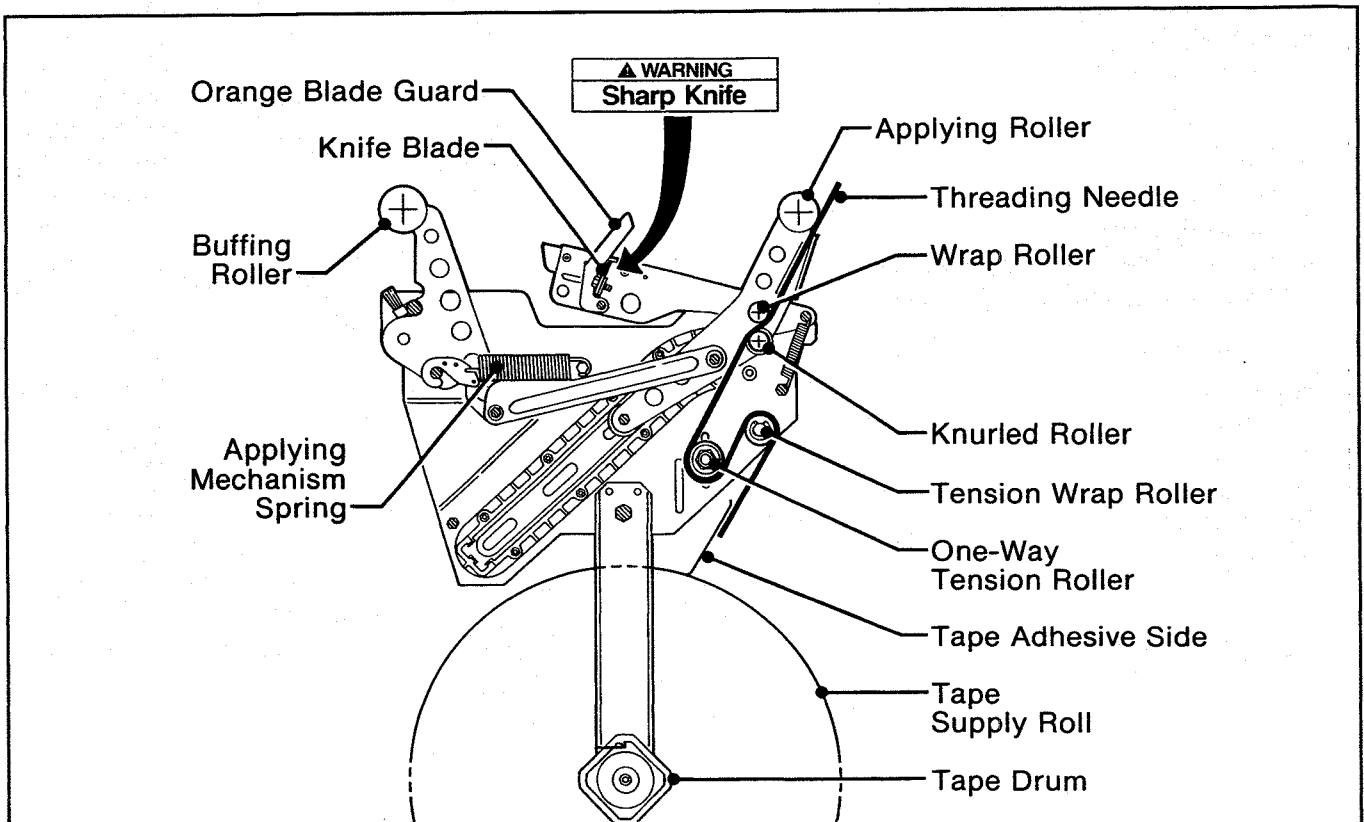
Taping Head Components/Threading Diagram – Lower Head (Left Side View)
